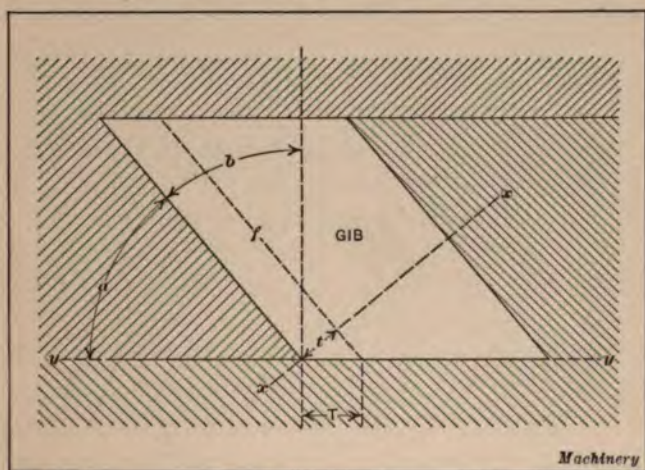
Illustrating Method of determining Taper of Dovetail Slide for Given Gib Taper
